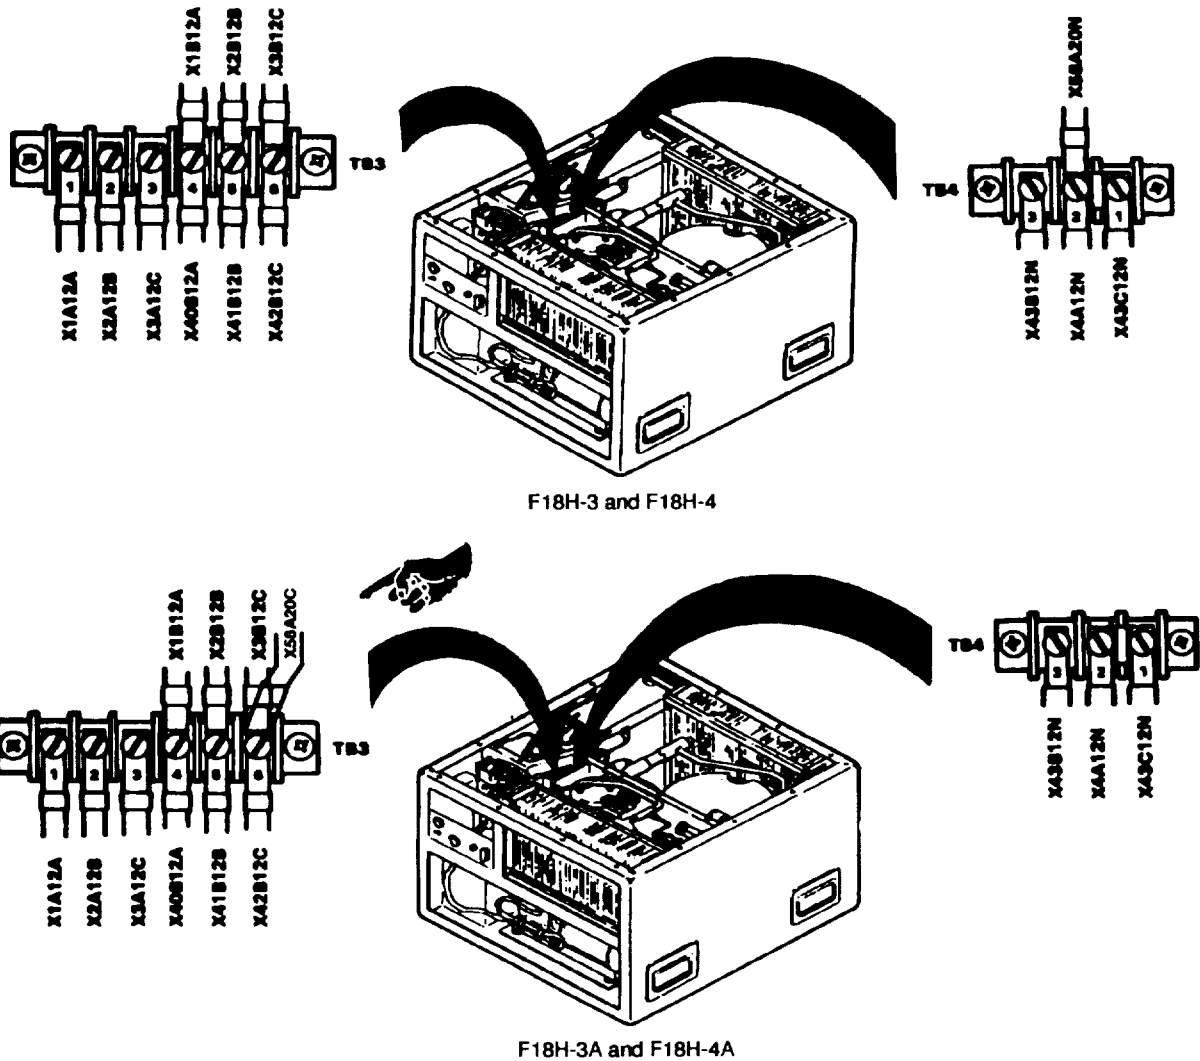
Connector J11 Wired at Terminal Board TB3 (Three Phase)
